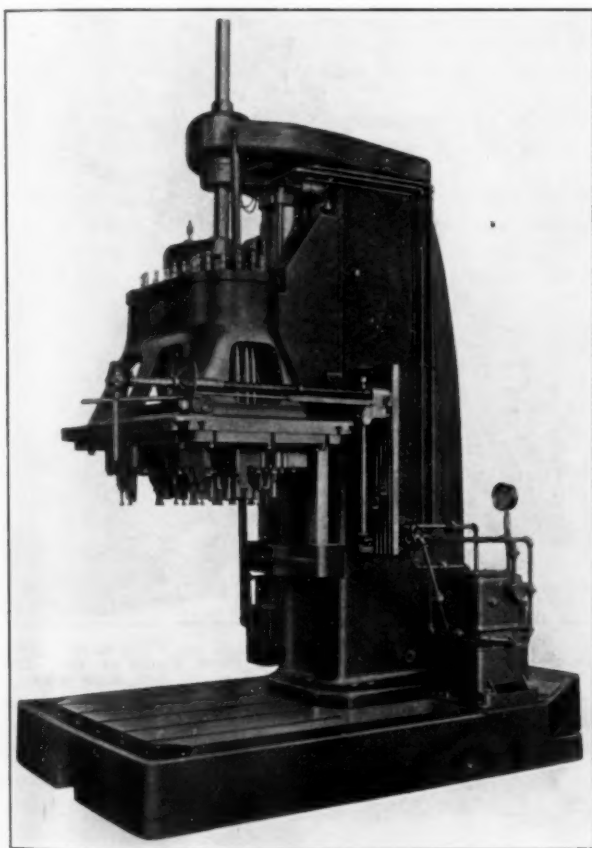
VERTICAL MULTIPLE-SPINDLE DRILLING MACHINE EQUIPPED WITH HYDRAULIC FEED
